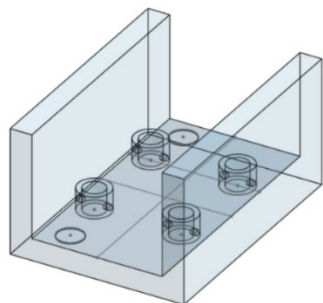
Thin Rectangular Bottom Chassis Designed to add Counterweights
